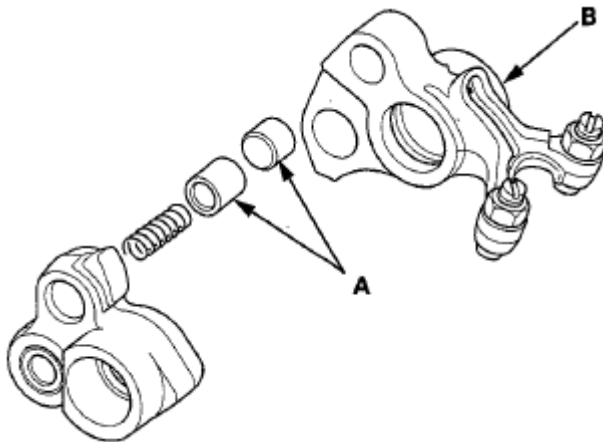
Identifying Intake Rocker Arm Pistons & Intake Primary Rocker Arm
